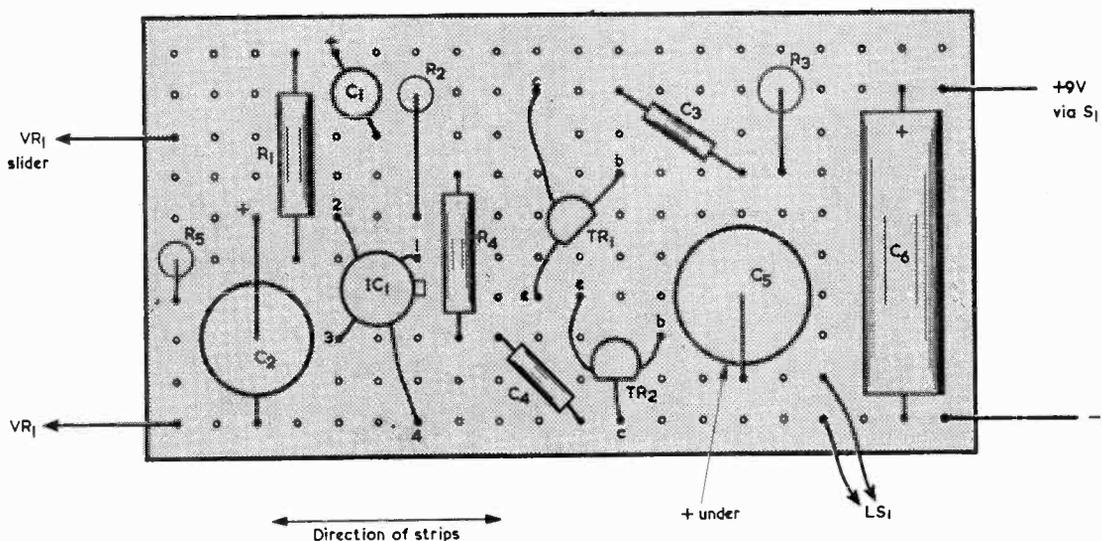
The component side of the Veroboard assembly. VR1 and S1 are external to the board
